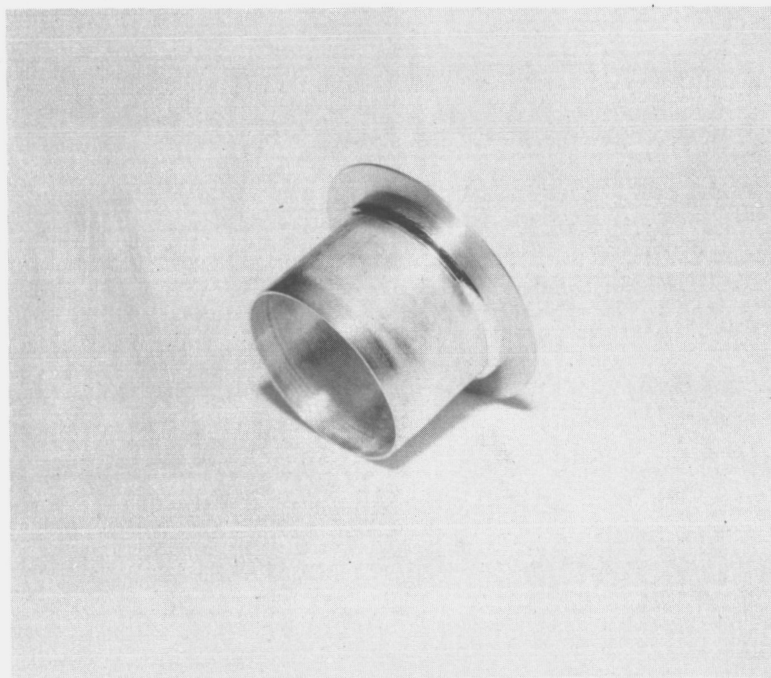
Niobium Flange Beam-Welded to a Rhenium Sleeve.
